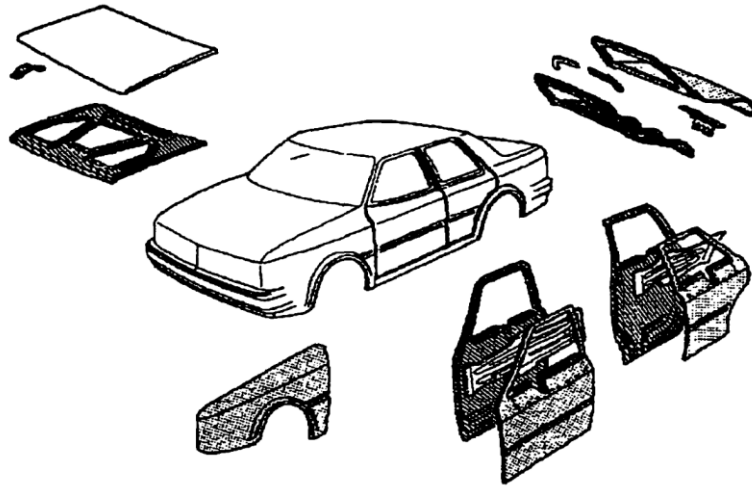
Flanged and hemmed parts on a car [22]. Courtesy of Dr. Haydar Livatyali.
